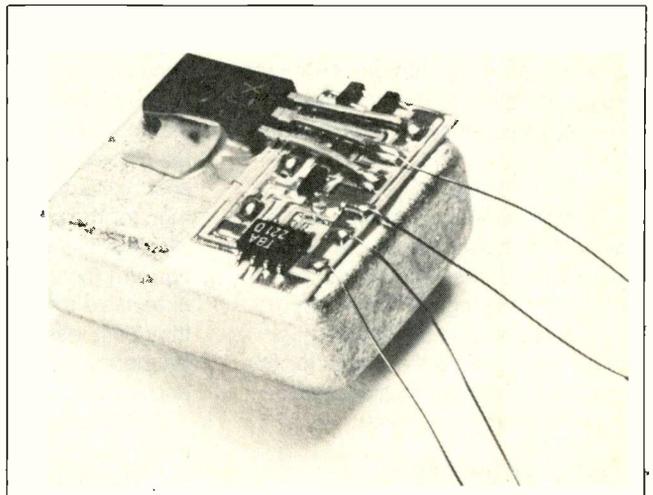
A view of the operational amplifier, the heating element transistor and crystal assembly which is mounted inside of the enclosure.
